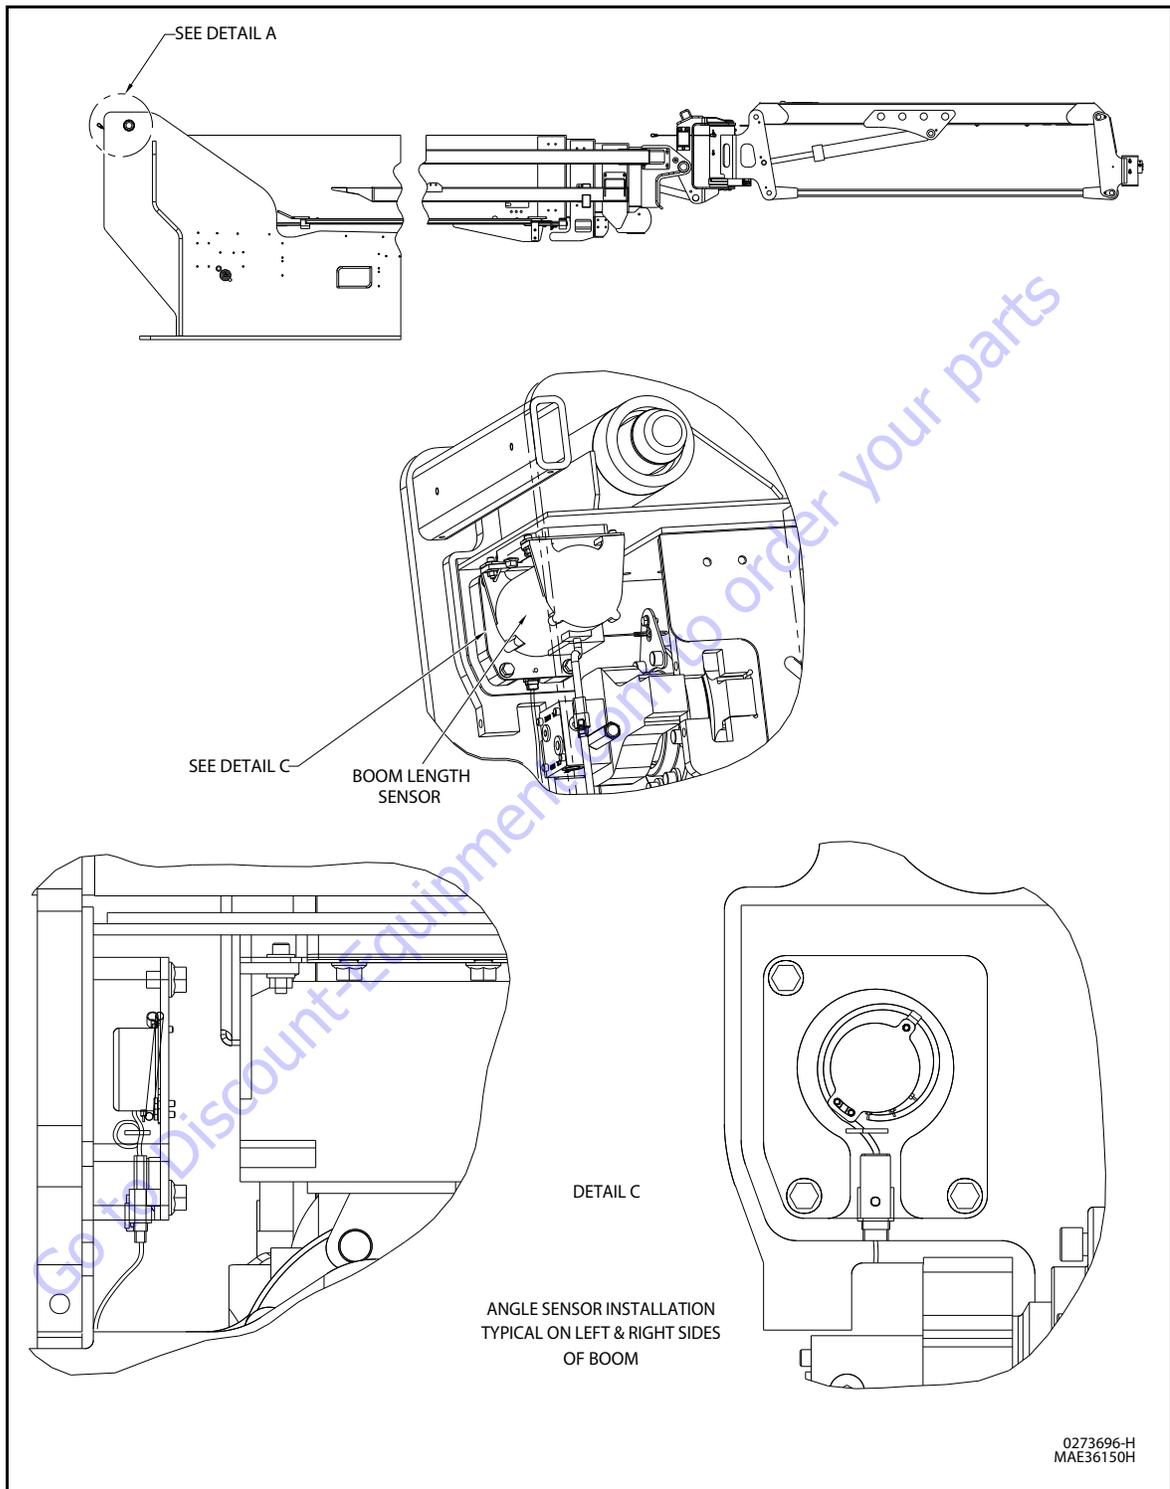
Boom/Jib Sensors and Switches Installation - Sheet 1 of 4
